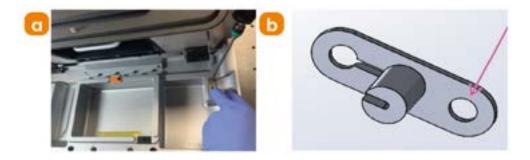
Attach the drawbridge mechanism facet to the backside of the replacement door with two screws using the T20 T-Shape Key. Ensure the circular through-hole of the facet is positioned with the screw hole as shown.
